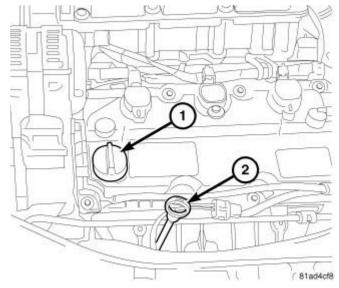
ENGINE OIL FILLER CAP AND DIPSTICK Courtesy of CHRYSLER LLC
